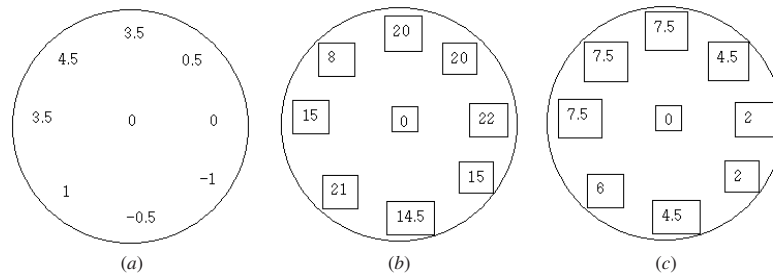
Height measurements (in μm) of glass plate, CMOS chip and dummy pieces: (a) glass plate; (b) before lapping; (c) after lapping.
